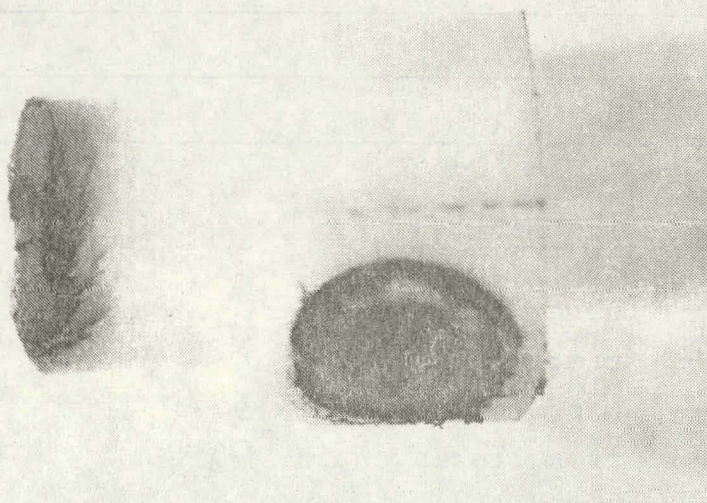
C. Dye penetrant test on fracture surface of used specimen.
